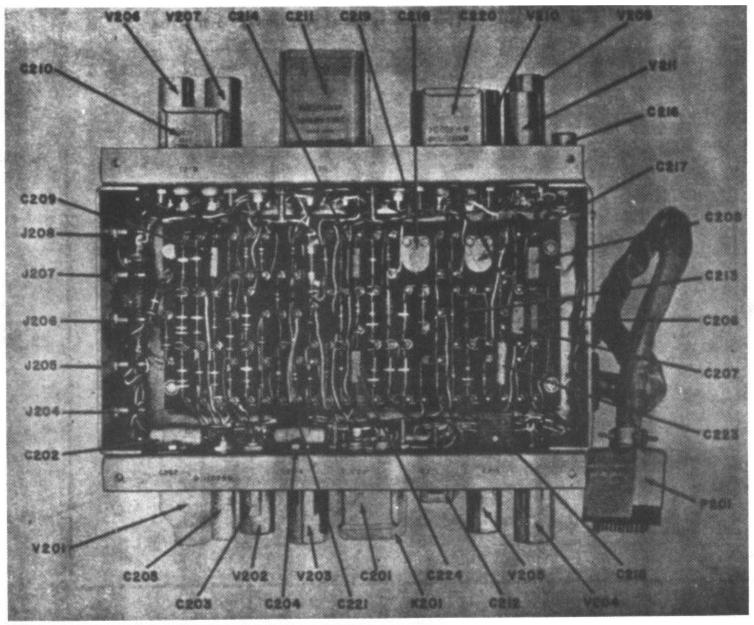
Modulator Chassis, Bottom View (Sheet 1 of 2).
